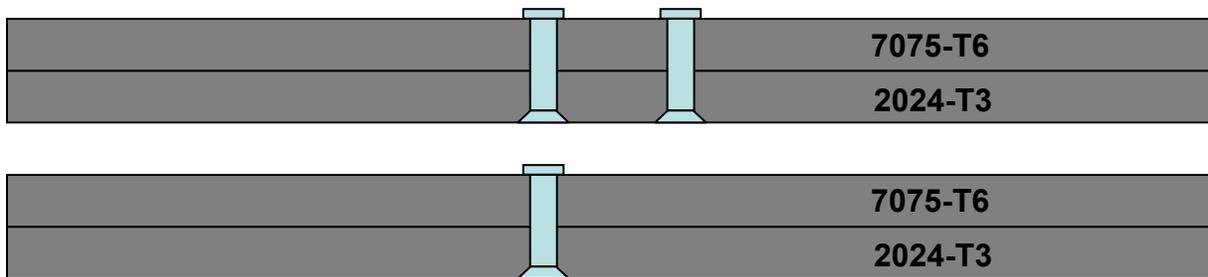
Countersink toward the Un-welded side (Type B & C)
